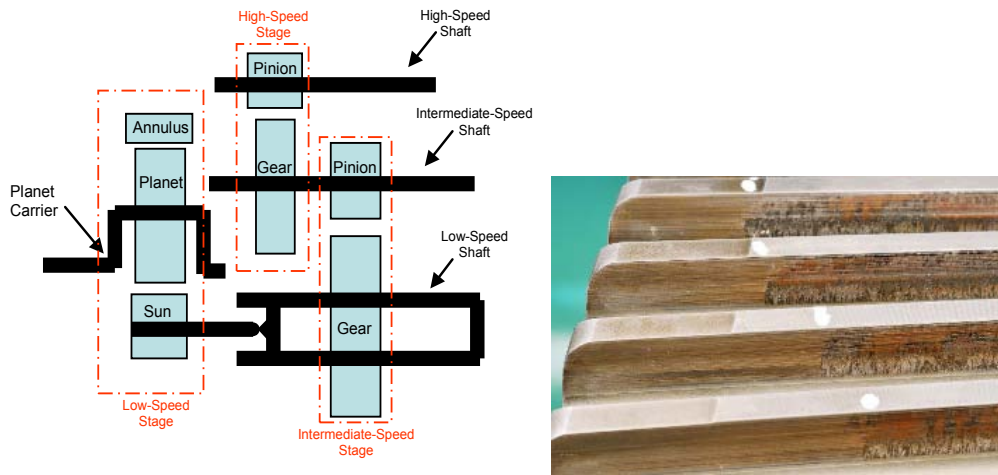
Internal configuration of the test gearbox. Figure 4. Damage to high-speed stage gear.
